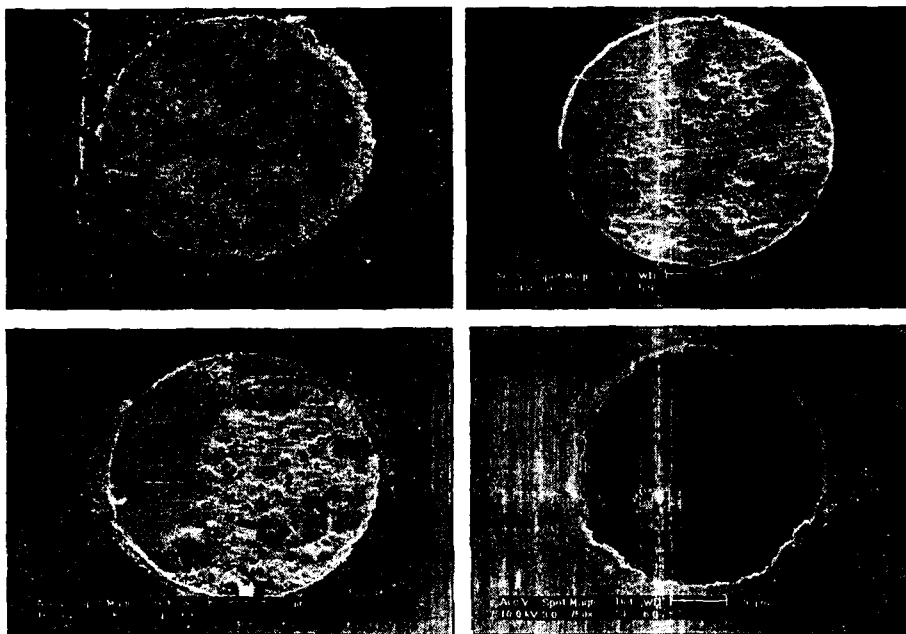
Bump shear fracture shape (a) Cu/Ni-30Cu/Cu (b) Cu/Ni-60Cu/Cu (c),(d) Ni (4 μ m)
